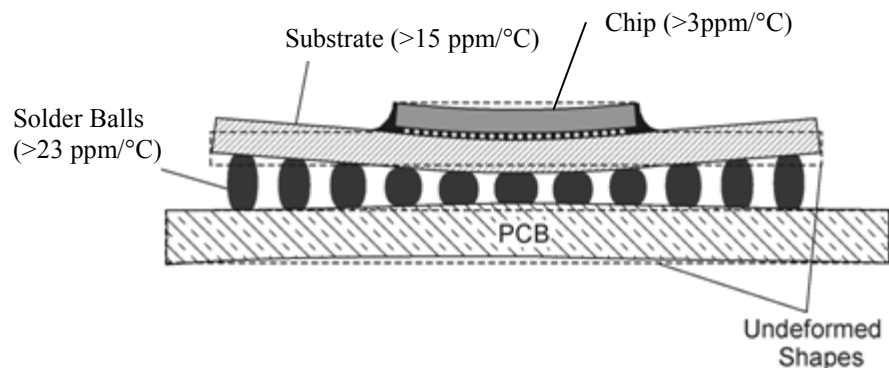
Cross-section of Ball Grid Array package with material CTE [3]
